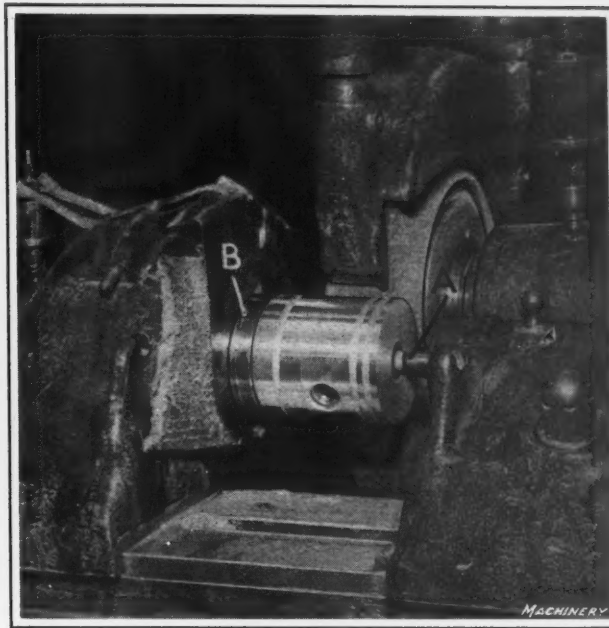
Cylindrical Grinding Machine equipped for grinding the Clearance on Essex Pistons
